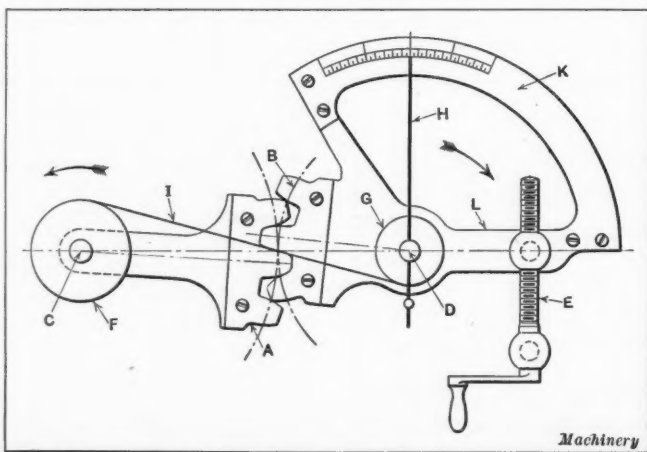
MacCord Odontoscope for testing Involute Curve of Gear Teeth
